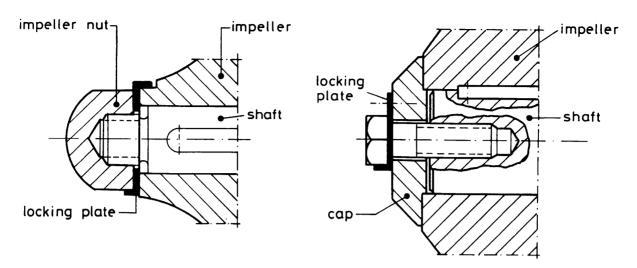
Locking plate on the impeller nut as a protection measure against unscrewing in reverse rotation
